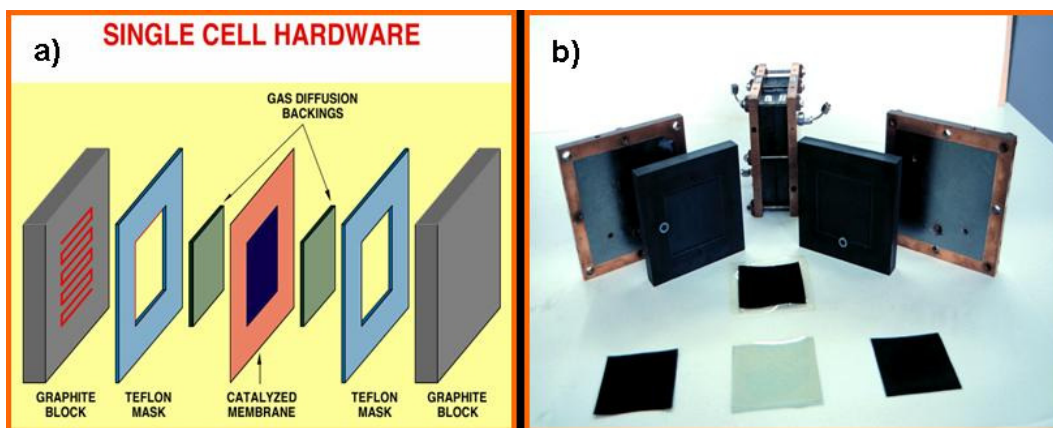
a) Single cell exploded view; b) Single cell components.
